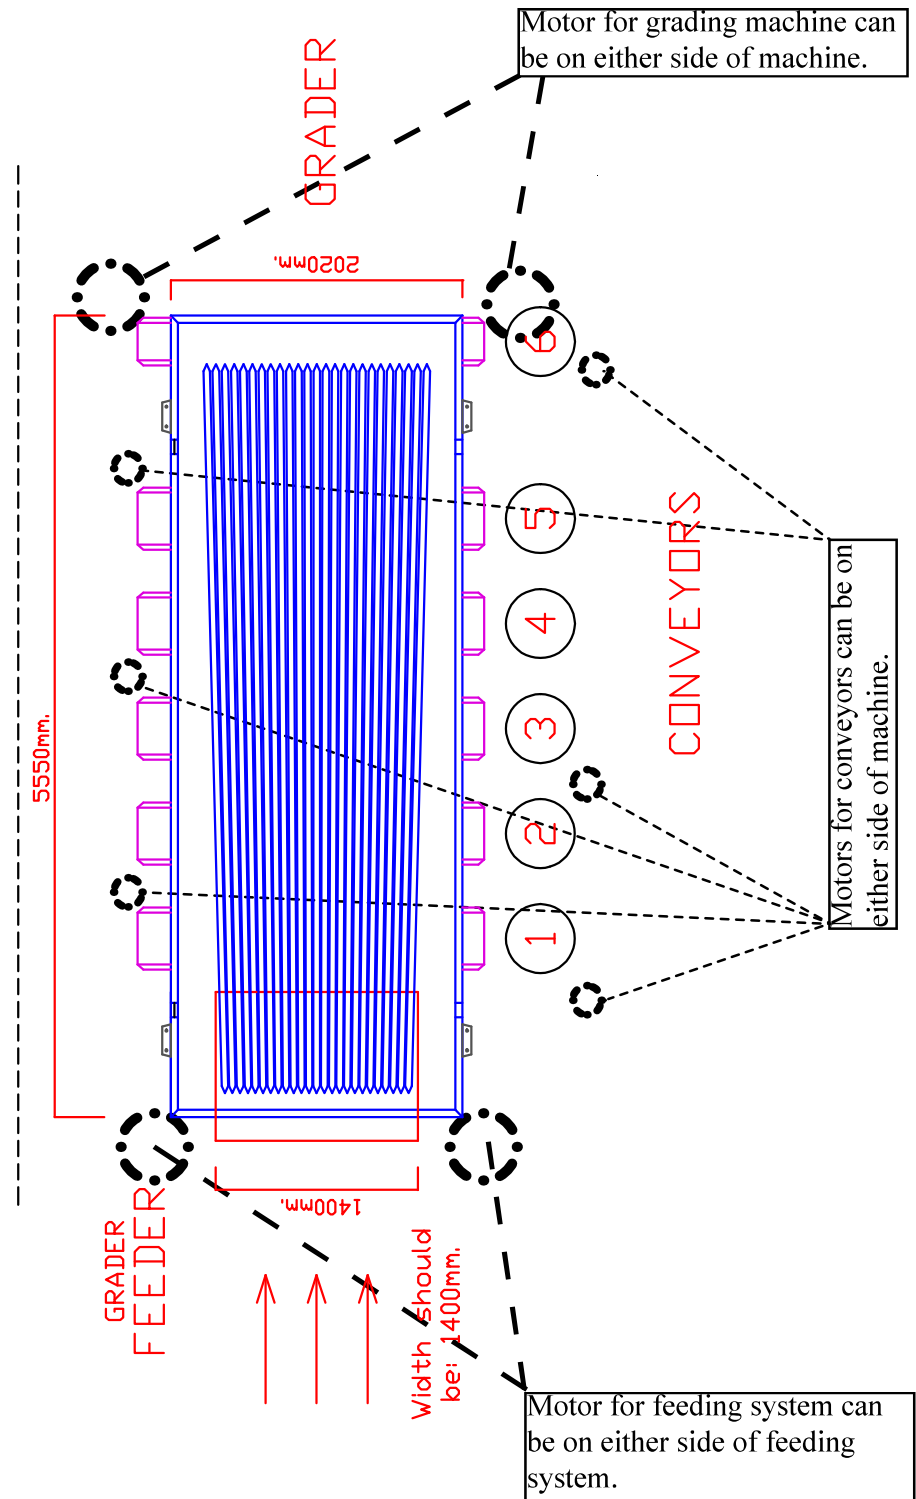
Fig. B. Top view of Style grading machine LR-5/24 with conveyors 1 to 6 inside machine.
